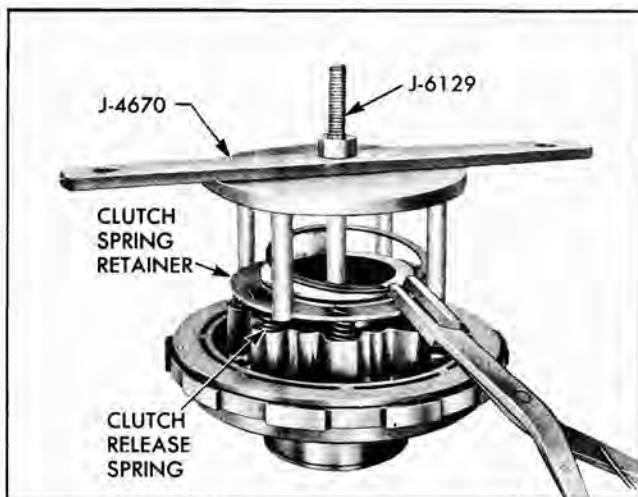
Removing Rear Unit Clutch Spring Snap Ring
